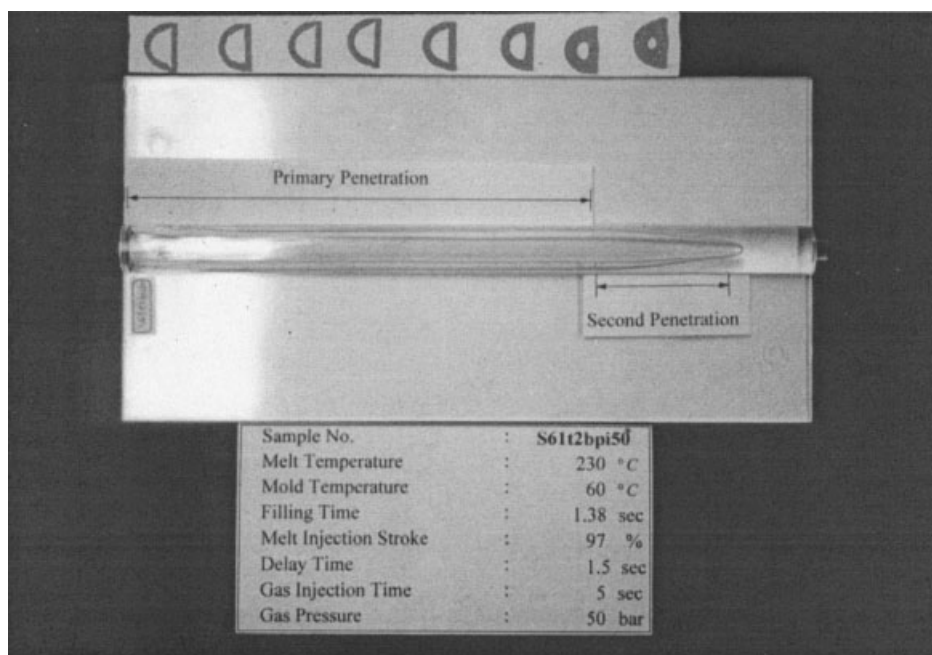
Typical gas-assisted-injection-molded part showing the gas channel and hollowed core due to gas penetration.
